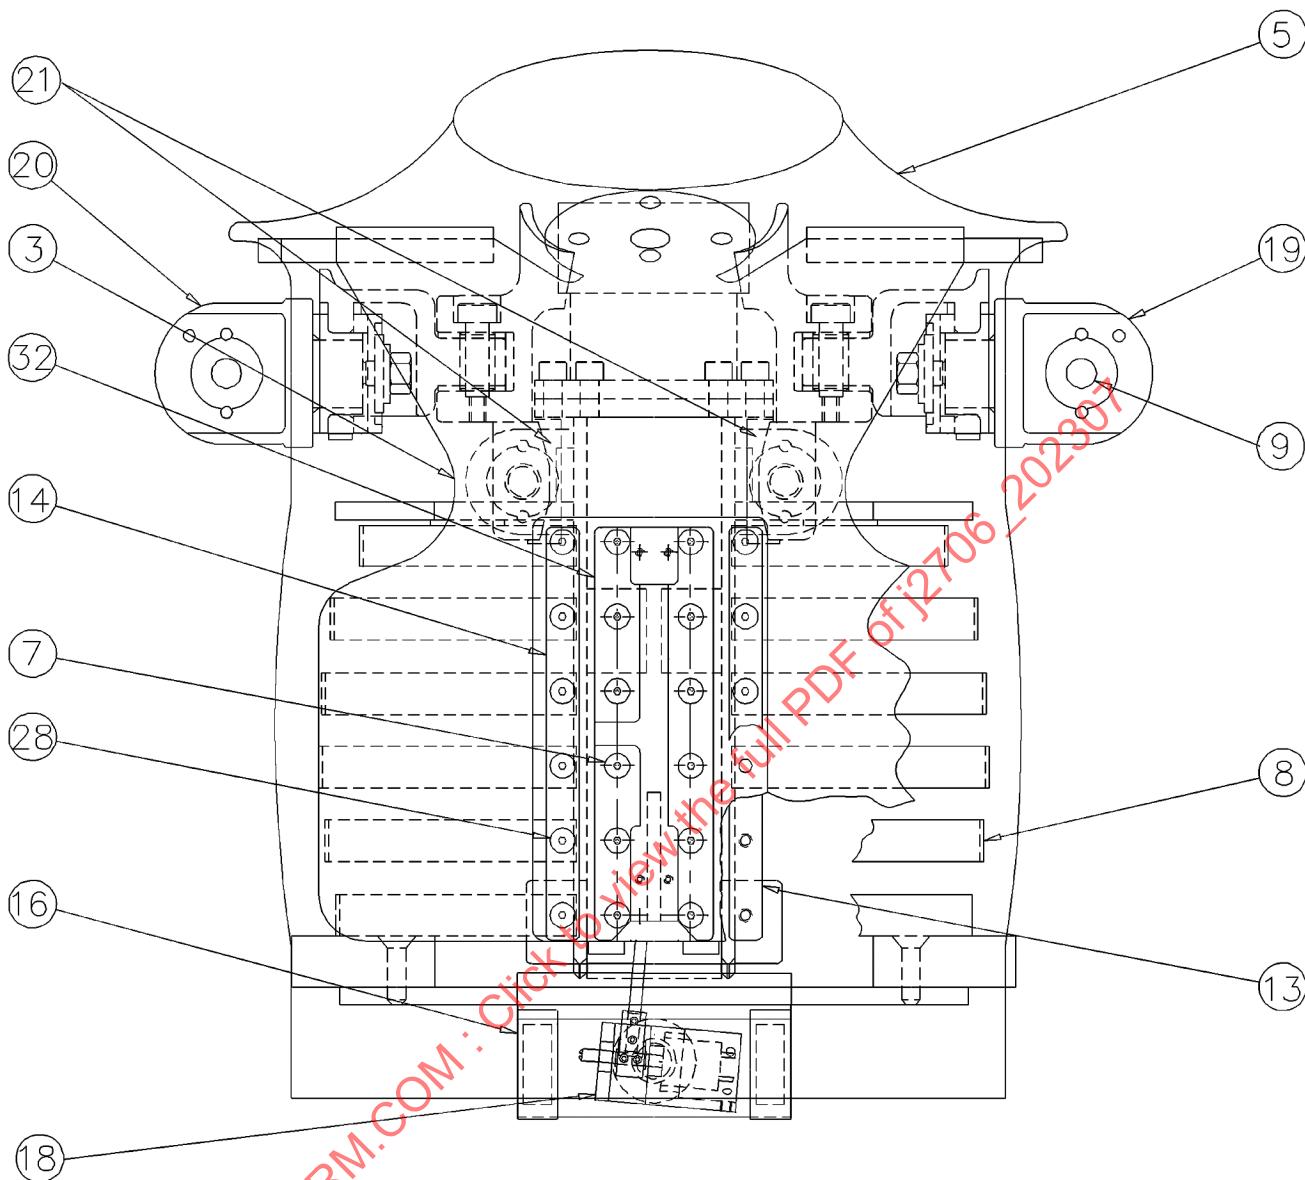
FRONT VIEW OF CHEST ASSEMBLY
